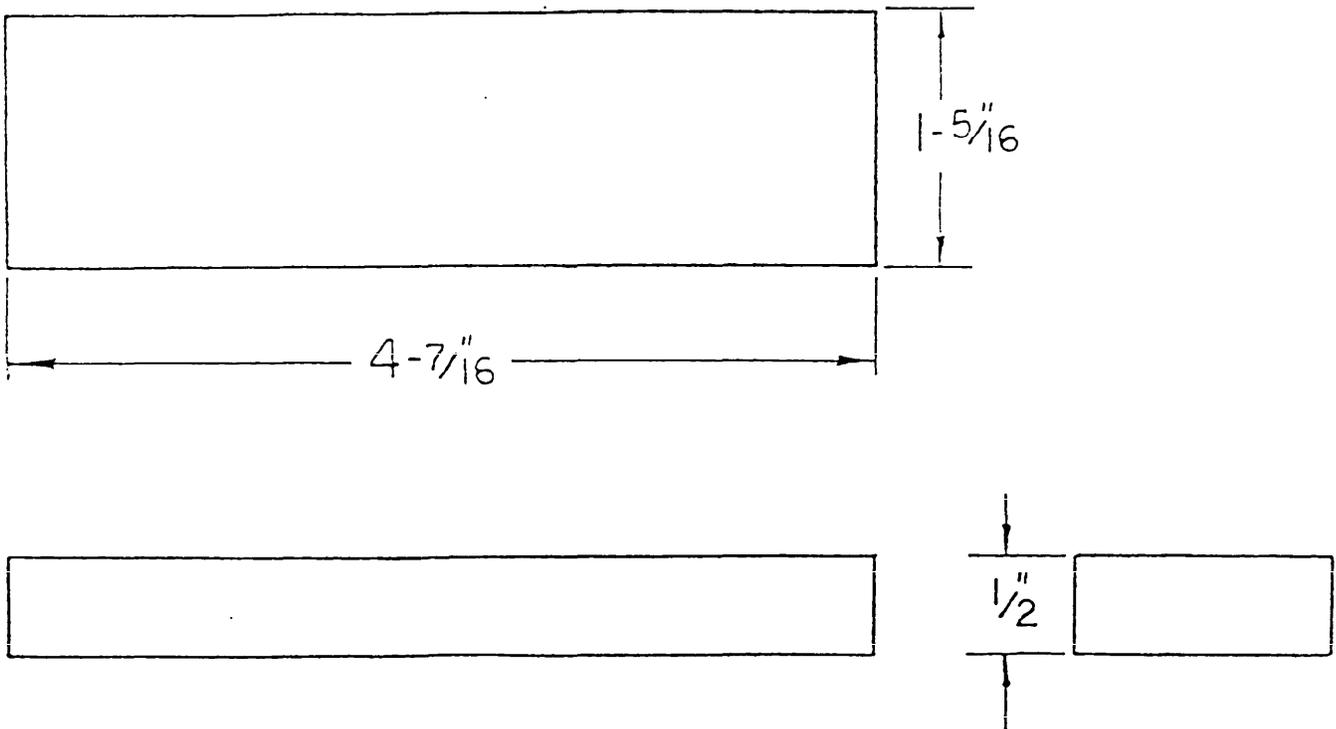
Pocket, Ammunition Magazine, 2-Clips, .45 Caliber. Auto Pistol, Leather
